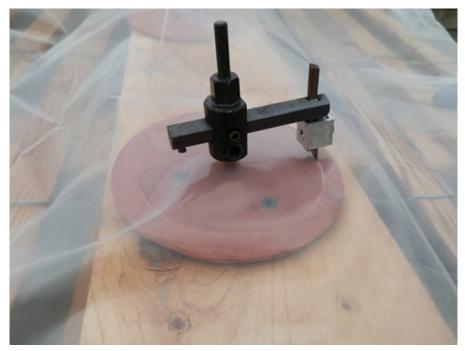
Polyethylene being cut using hole cutting jig (clear polyethylene demonstrated to show use of the DeBerg Hole Cutter Jig), shown using an adjustable wood hole cutter that was modified by replacing the steel blade with a replaceable X-acto[™] blade.
